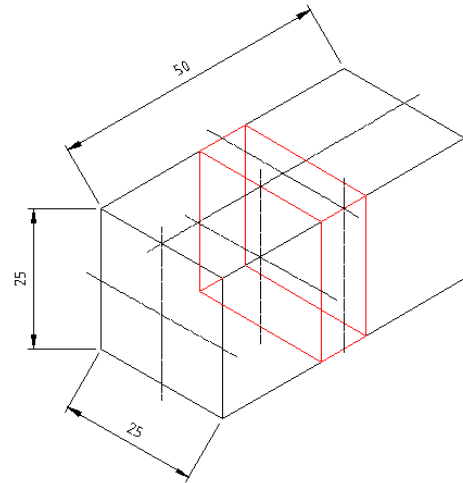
Geometry and dimensions of the specimen used for the fatigue crack growth rate tests.
